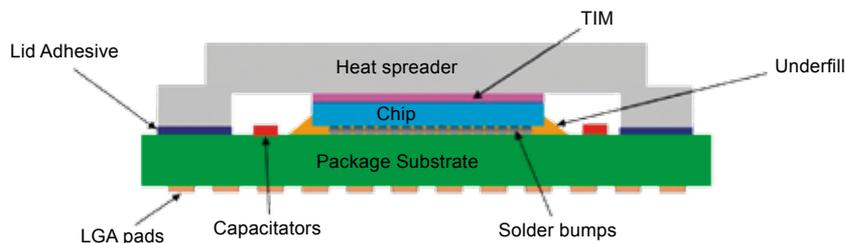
Schematic of generic flip-chip. The flip-chip faces down and is typically attached via solder bumps to the printed package substrate or circuit board. The underfill layer locks the die, or chip, to the substrate layer, protecting the bumps and improving durability.
